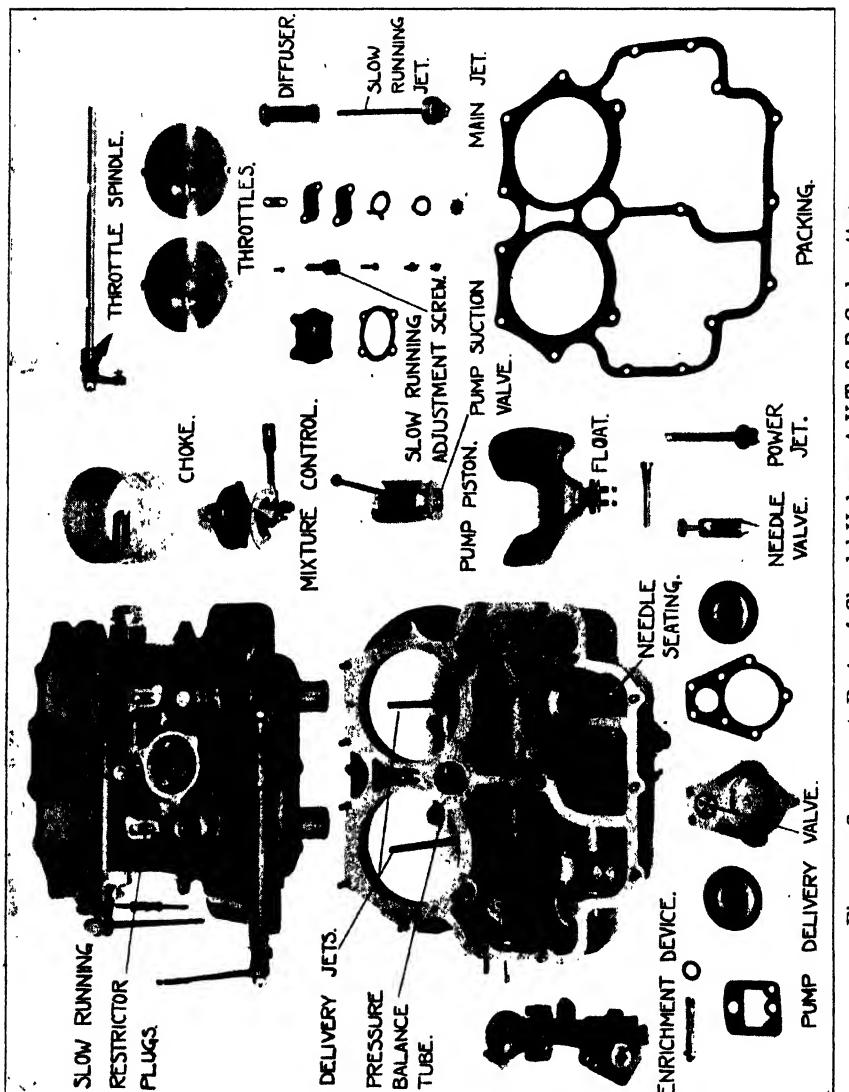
Component Parts of Claudel-Hobson A.V.T. 85E Carburettor.
